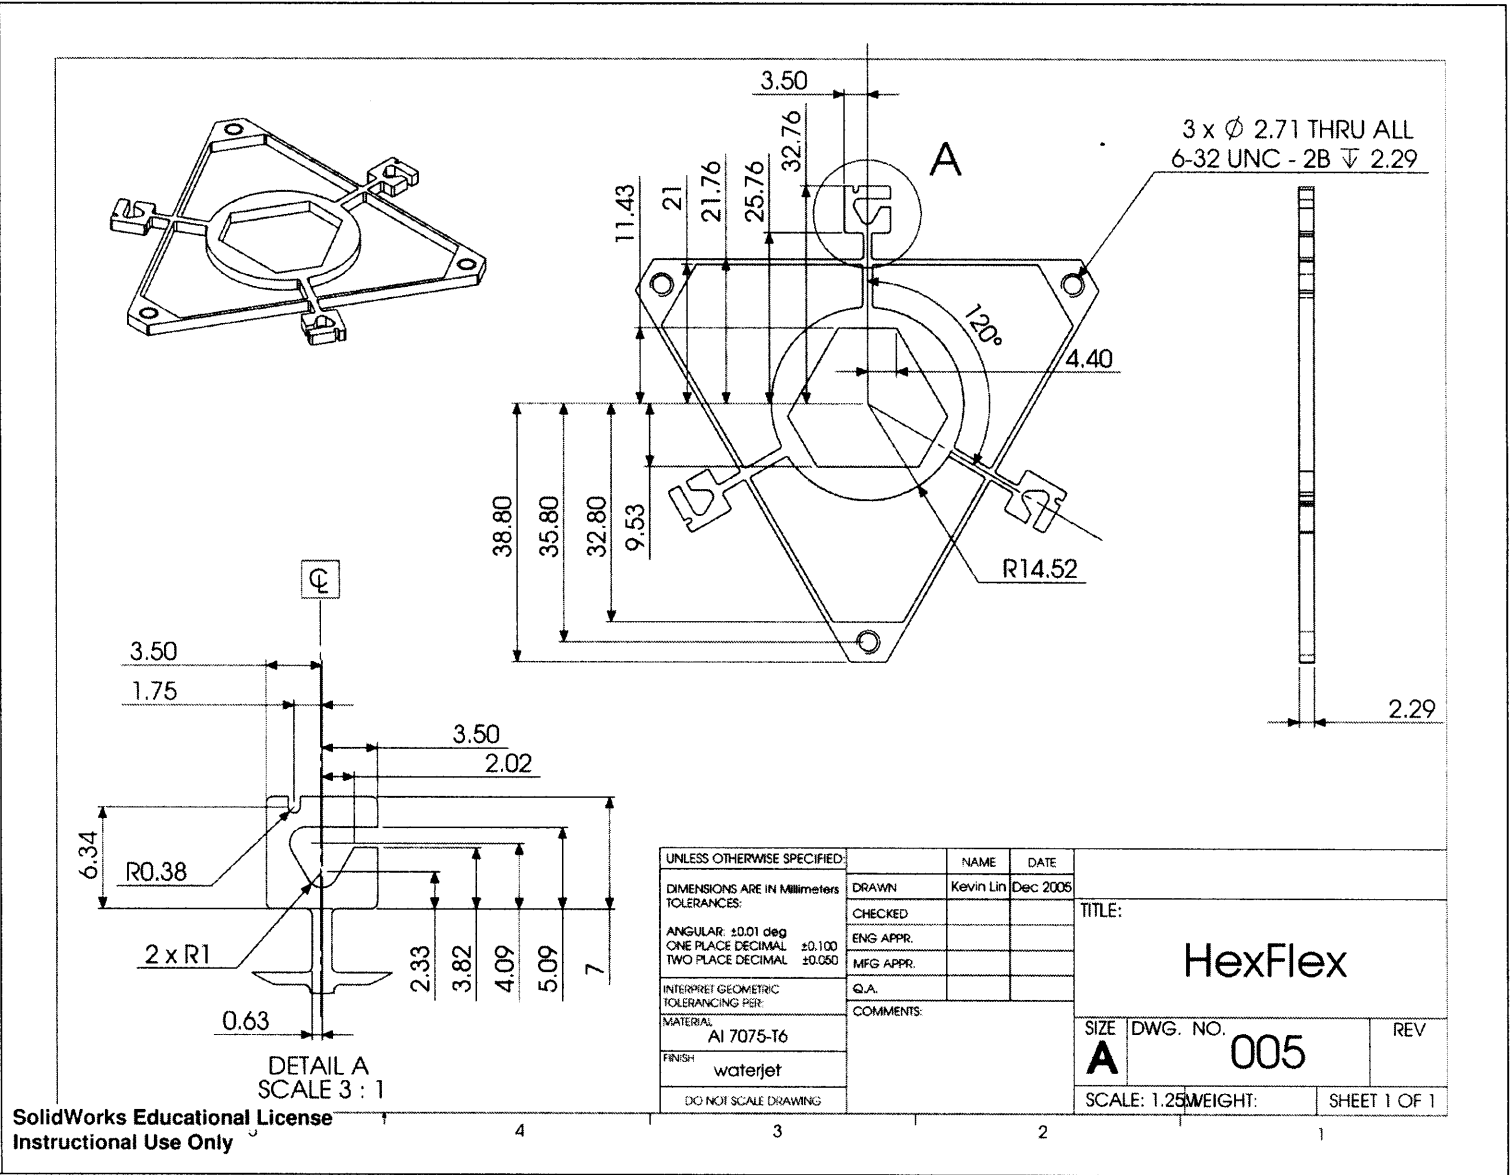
Engineering drawing of support flexures for guiding out-of-plane motion.
